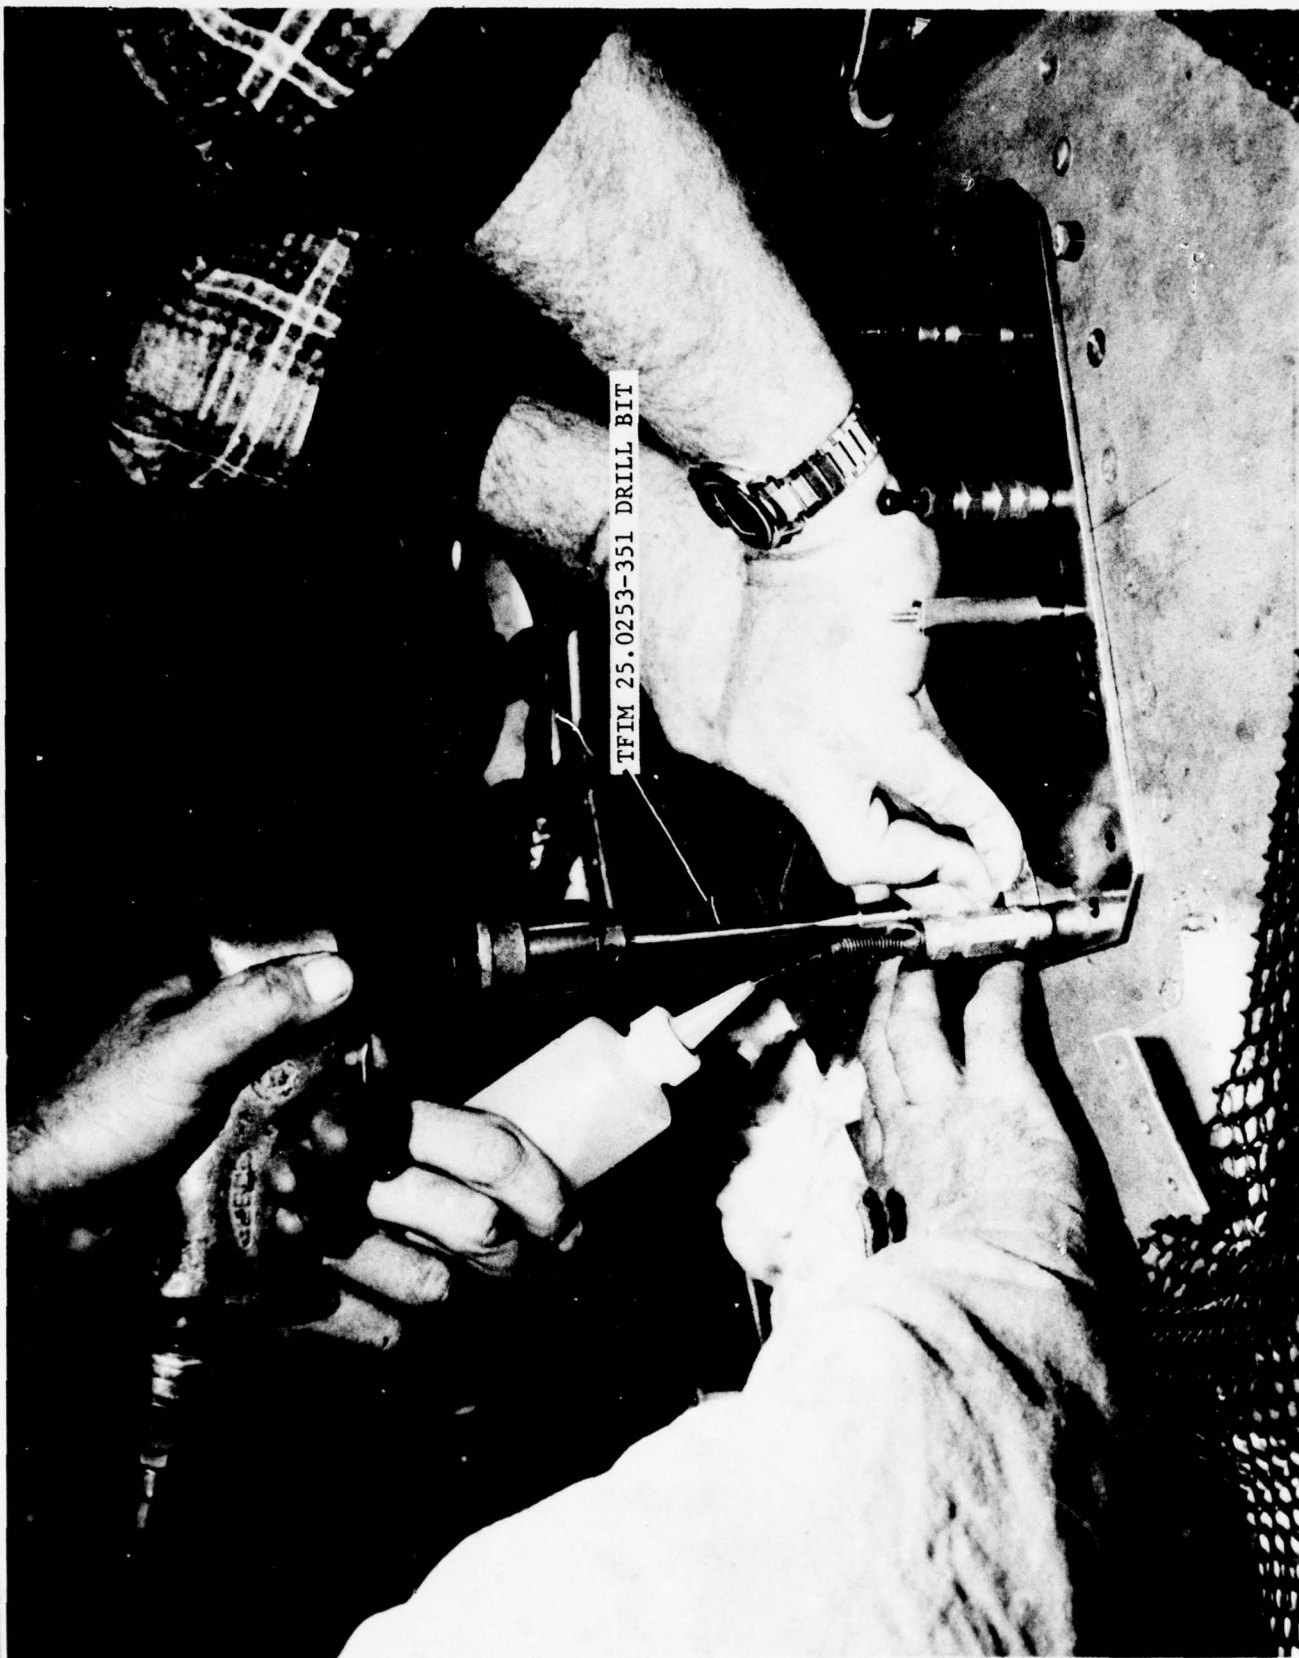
DRILLING ATTACHMENT HOLE IN LAMINATE
